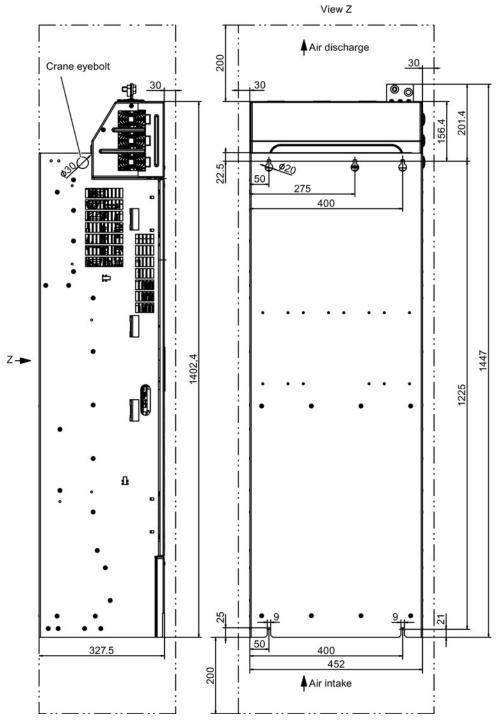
Dimension drawing PM330 frame size GX, view from the side, view from the rear
